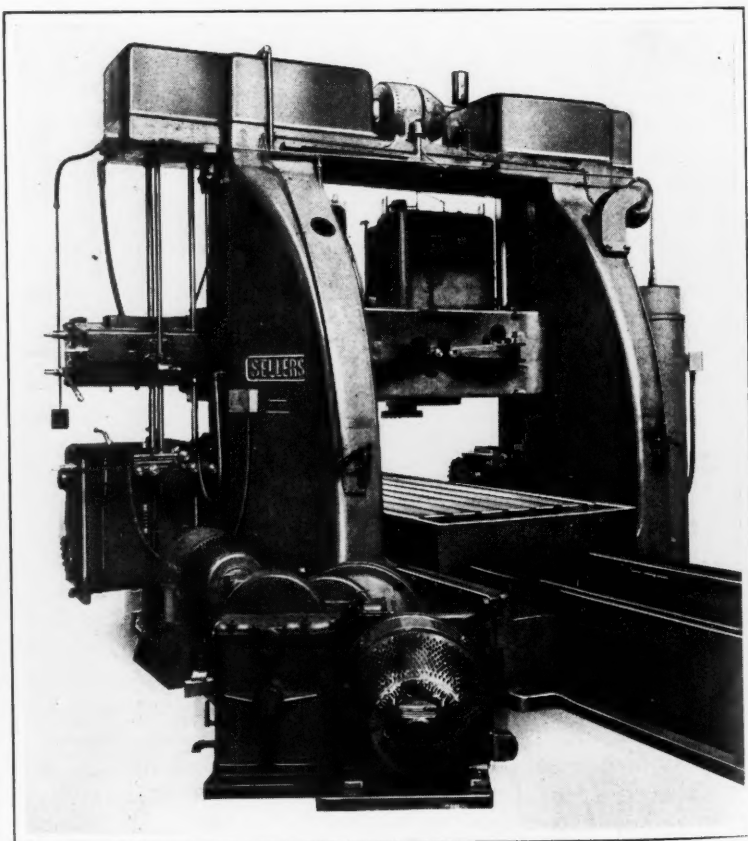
View of the Sellers Planer-type Milling Machine from the Rear of the Uprights
